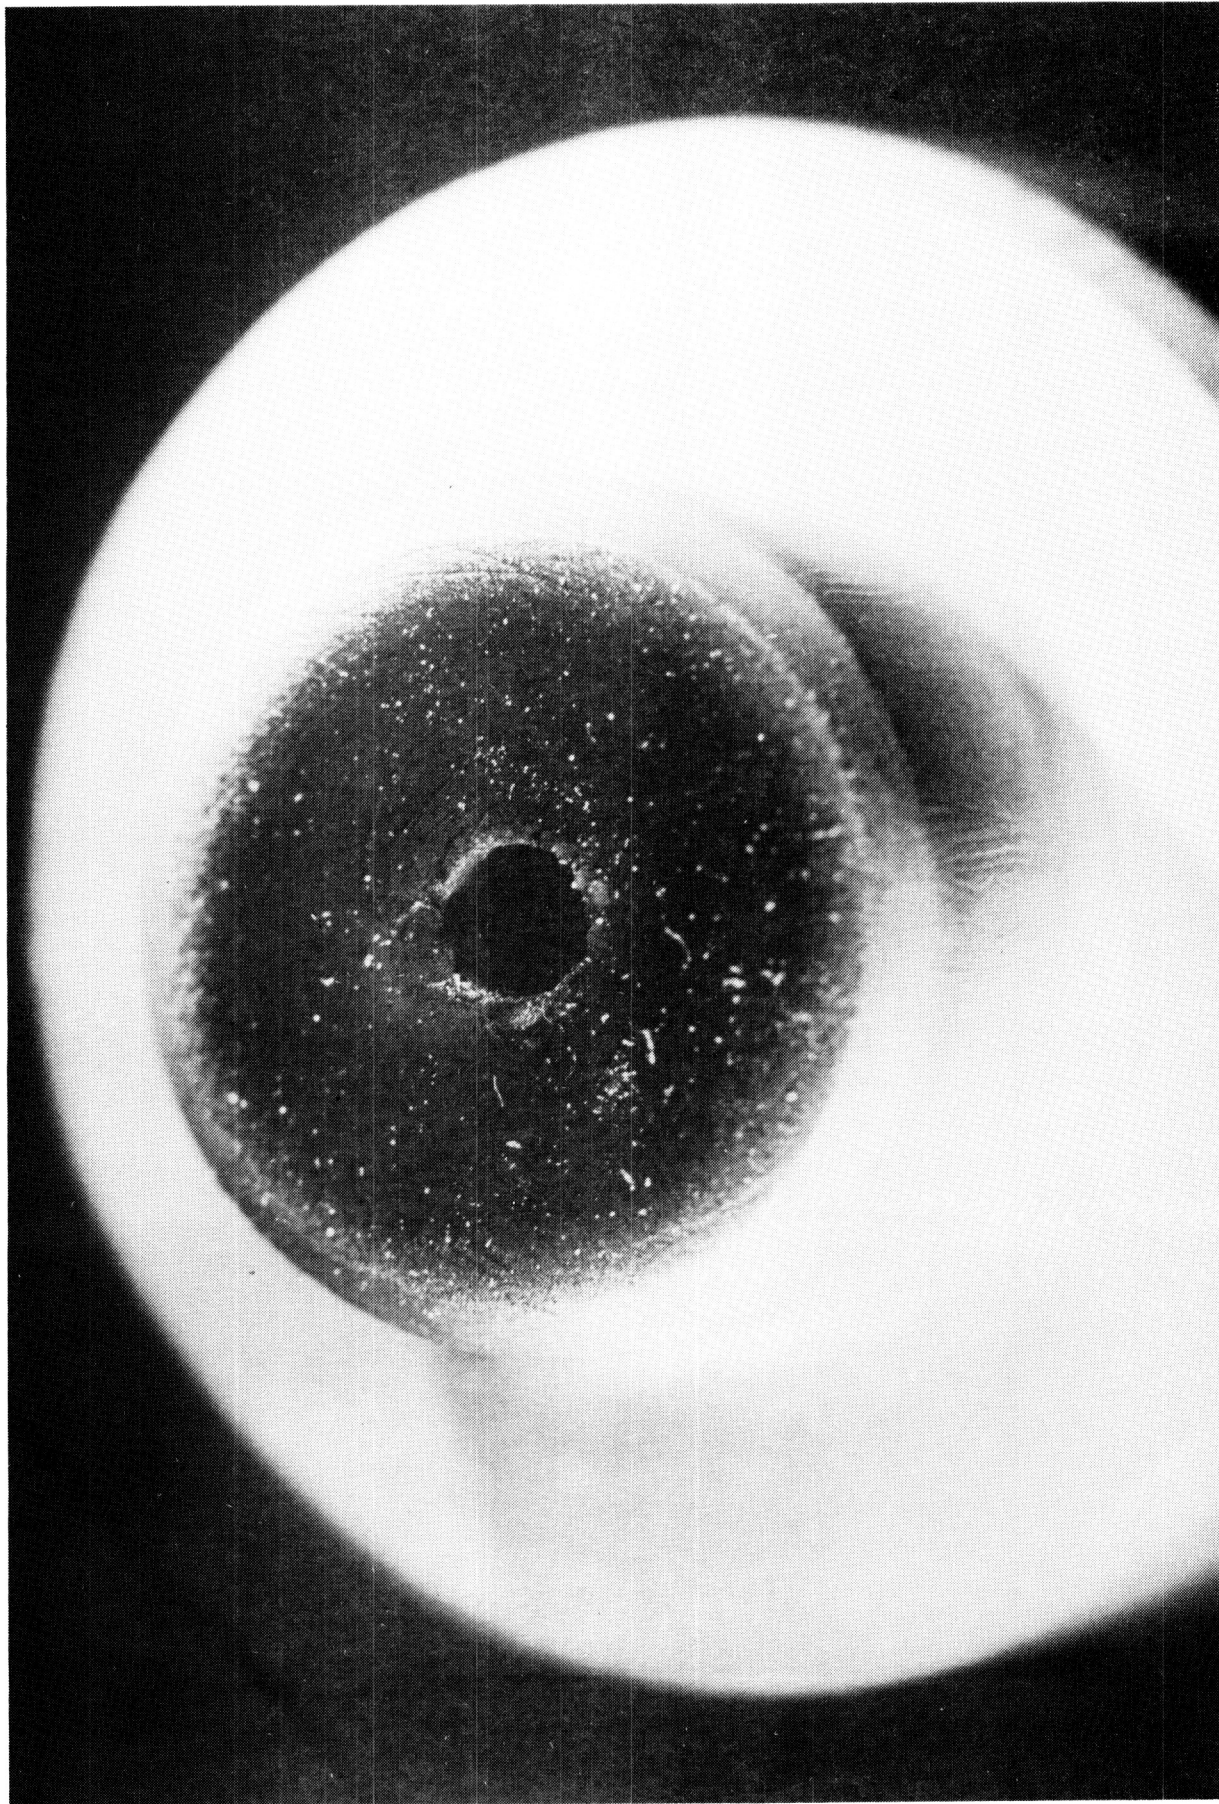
View of Insulator Face After Test No. 172 (Approx. 22X)
